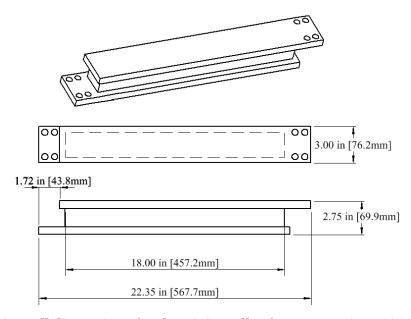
Overall dimensions for the Divinycell H foam core ASTM C273 specimen.
